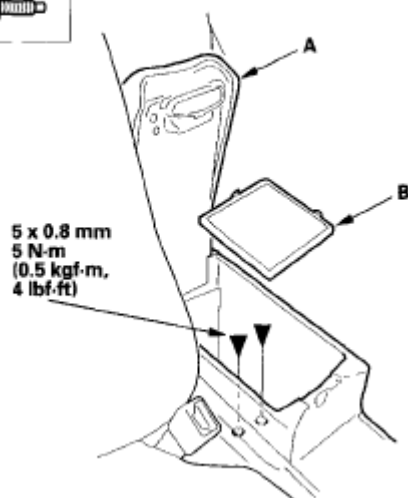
Removing Console Box Mat And Bolts (With Specifications)
